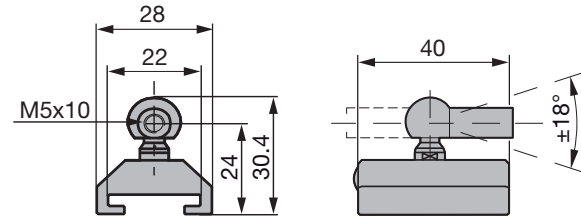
Installation dimensions of BTL5-F-2814-1S magnet
